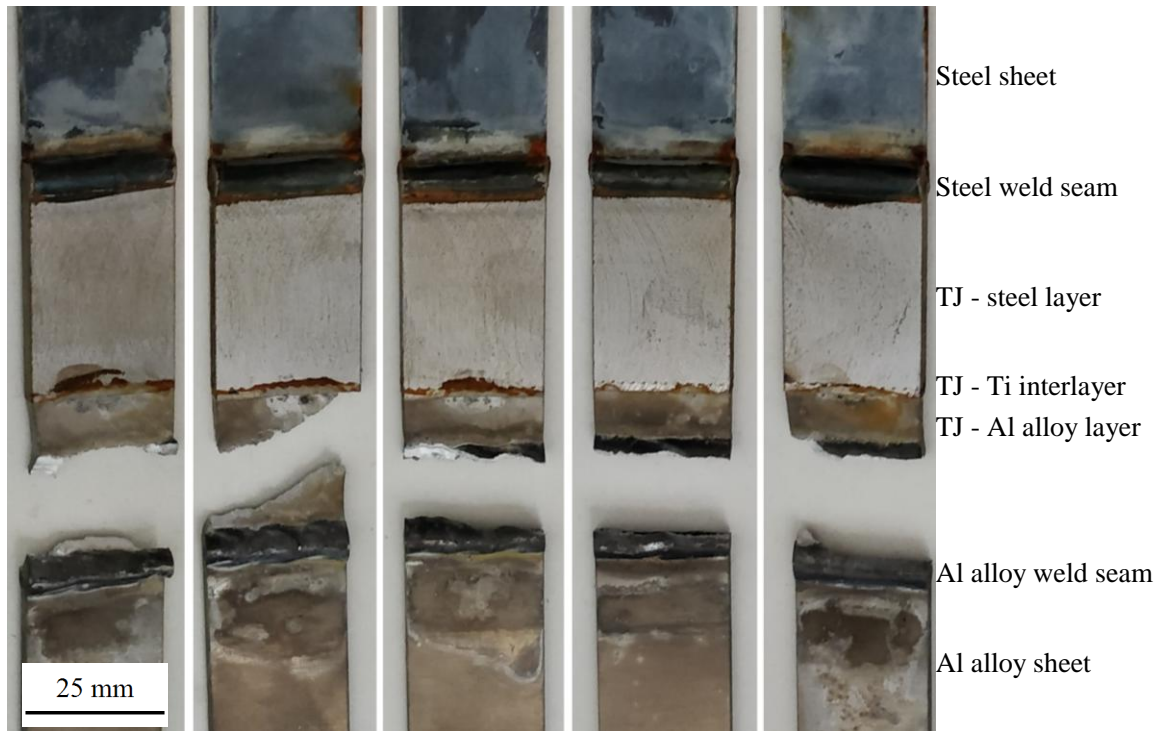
Type C hybrid joint specimens, after welding, corrosion, and tensile testing. TJ means Transition Joint.
